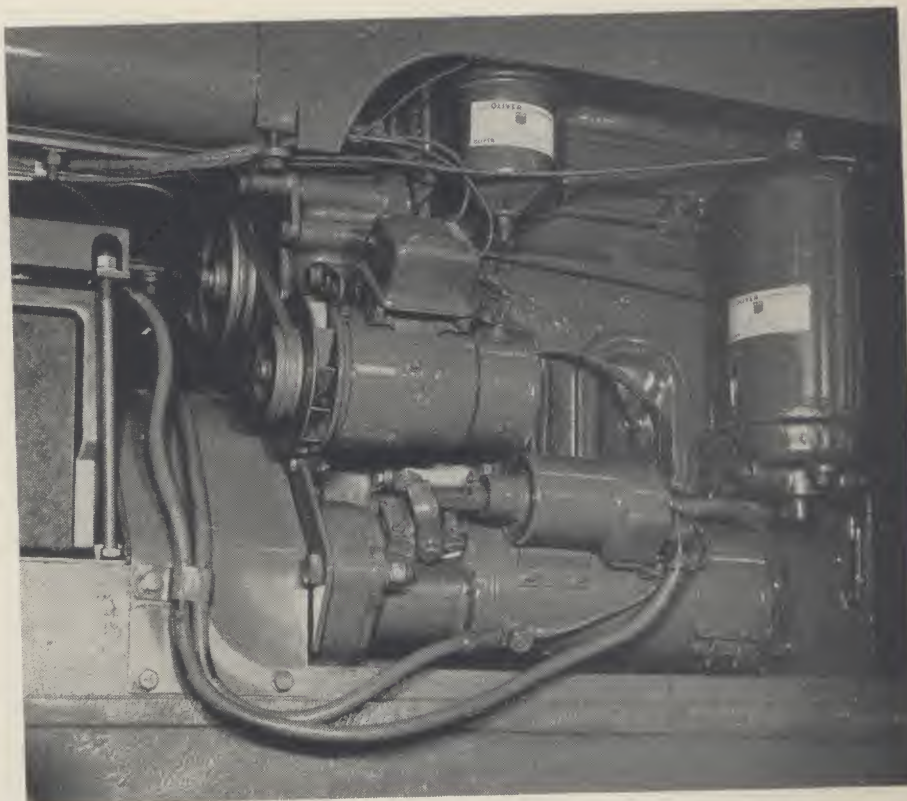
Installation view of generator and starting motor on a GM 3-71 engine.
